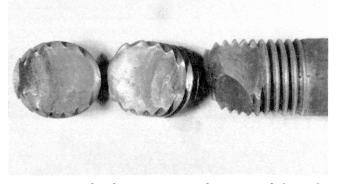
Multi-Plane Fatigue Failure Caused from the Thread Being Tapered Resulting in Non-Uniform Loading.
